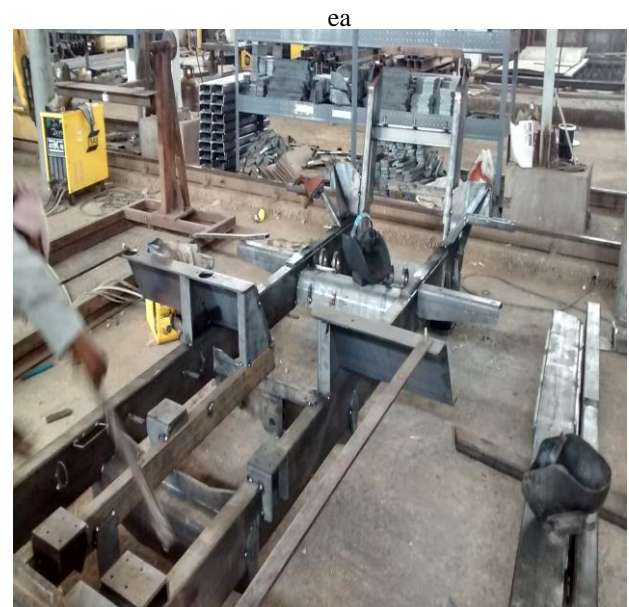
Tack Welded Chassis is kept on bare floor, Chances of dimensional variation in tack welded component
